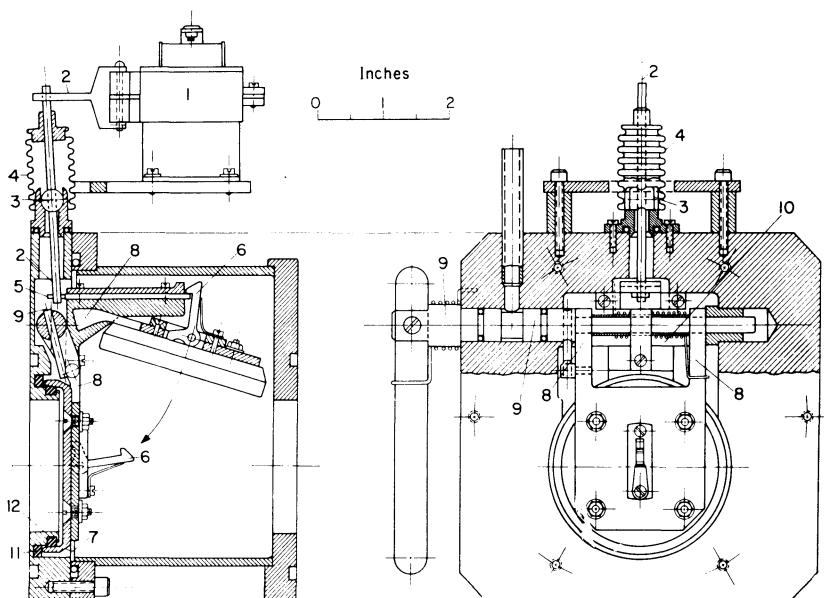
Quick closing flap valve. After Knudsen⁷⁰¹ (*Courtesy of The American Institute of Physics*)
